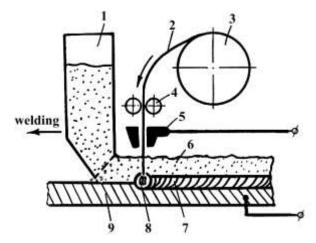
Automatic welding by a welding tractor: 1-tank for a flux; 2-wire; 3-cassete; 4-rolls for wire supply; 5-guide sleeve; 6-flux layer; 7-weld; 8-arc; 9-base metal
